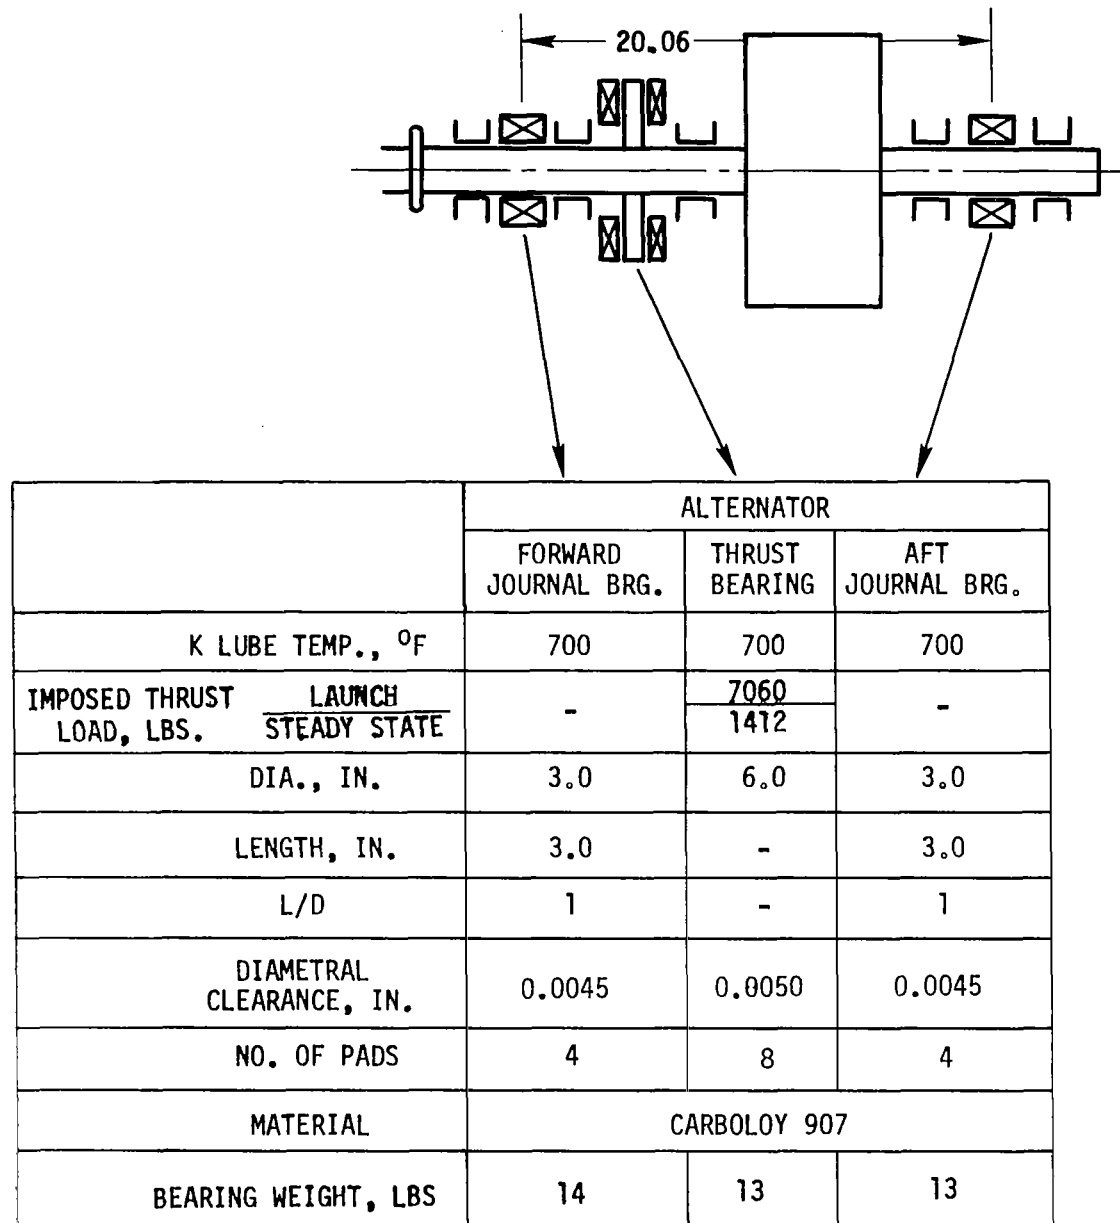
7+4 Alternator Bearings - H-11 Steel Stubshafts.
